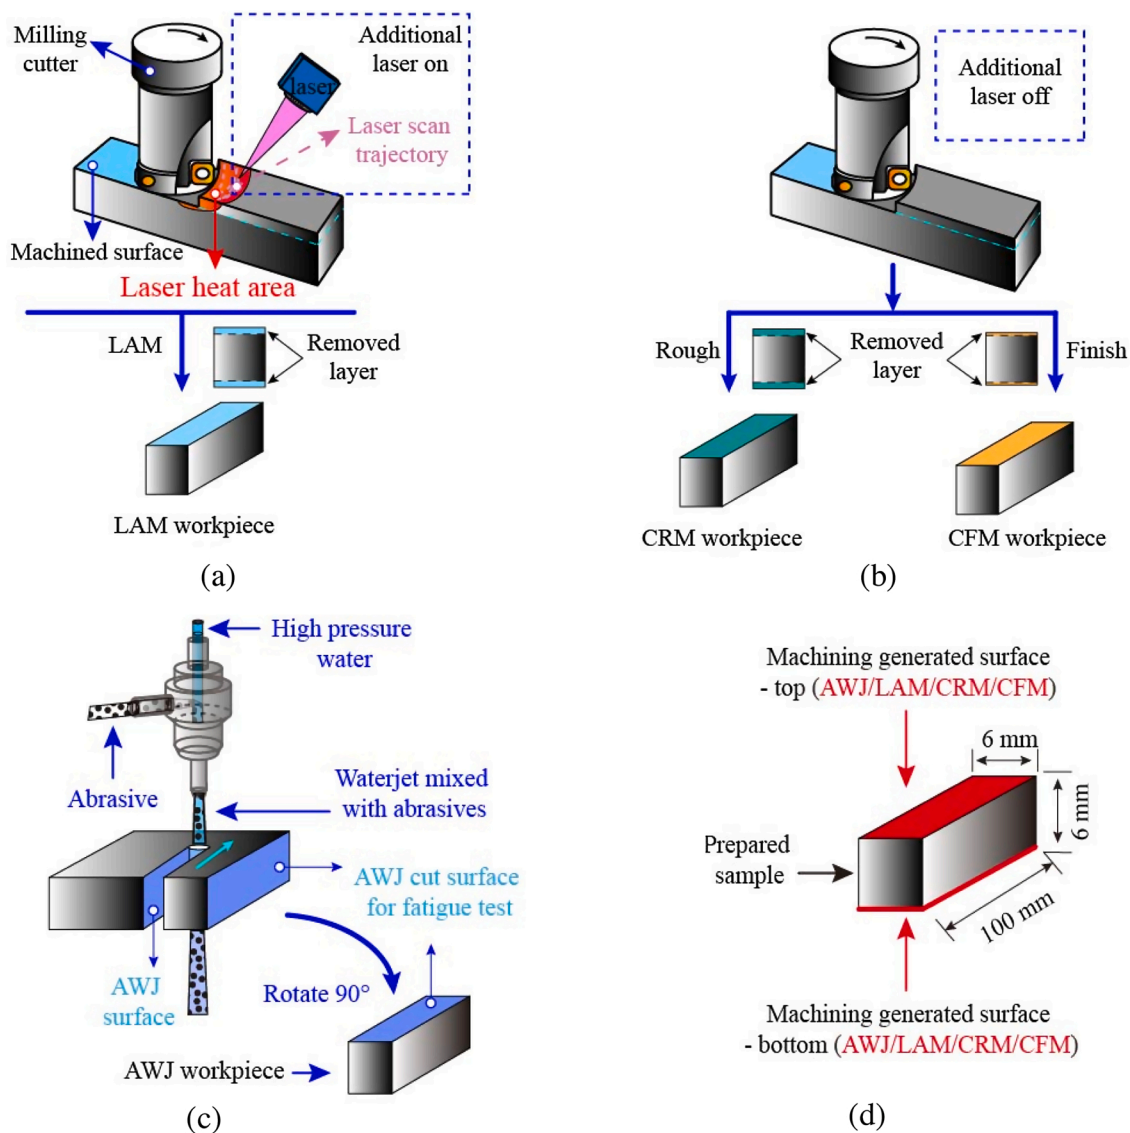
Illustration of different cutting processes for generating samples for fatigue testing: (a) Laser assisted milling – LAM, (b) Conventional rough and finishing milling – CRM, CFM, (c) Abrasive waterjet cutting – AWJ, and (d) final workpiece employed for 4 points bending fatigue tests.
